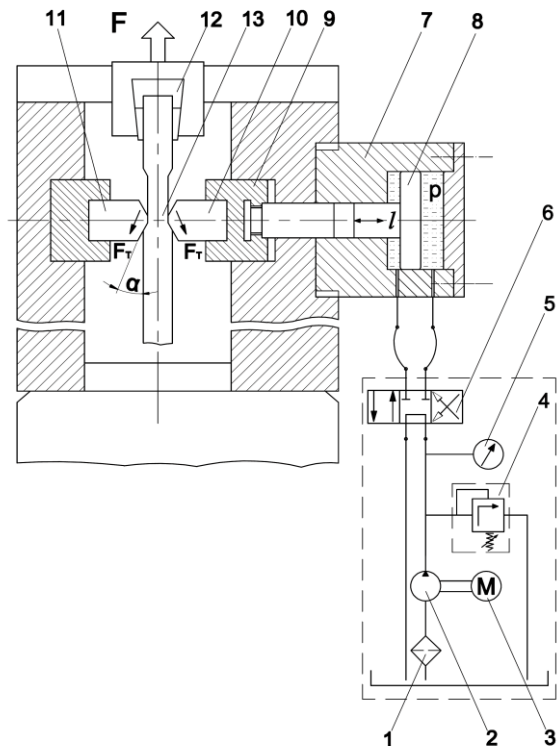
Block scheme of the experimental apparatus: 1-Filter, 2-Pump, 3-Driving motor, 4-Irreversible valve, 5-Manometer, 6-Two-position distributor, 7-Cylinder, 8-Piston of cylinder, 9-Holder with the T-groove, 10 and 11- Ironing die elements, 12-Jaws for sample clamping, 13-Sample
